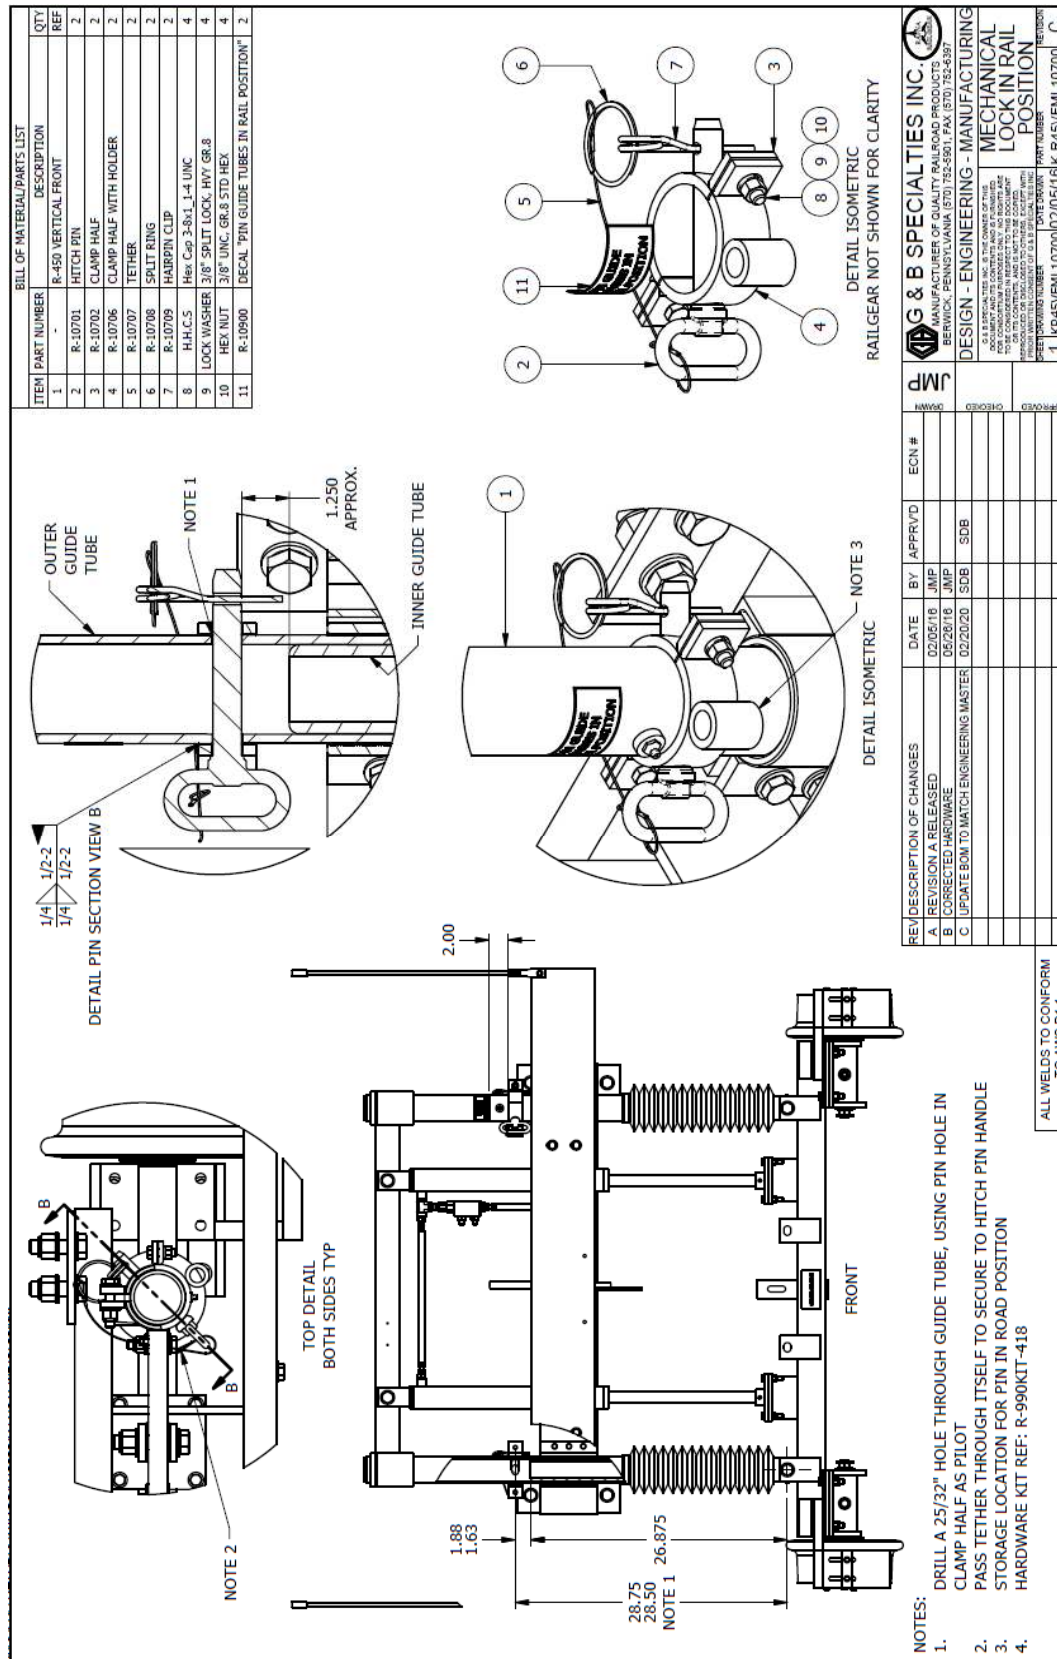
Front Railgear Manual Lock Assembly (K-R45VFML10700)
